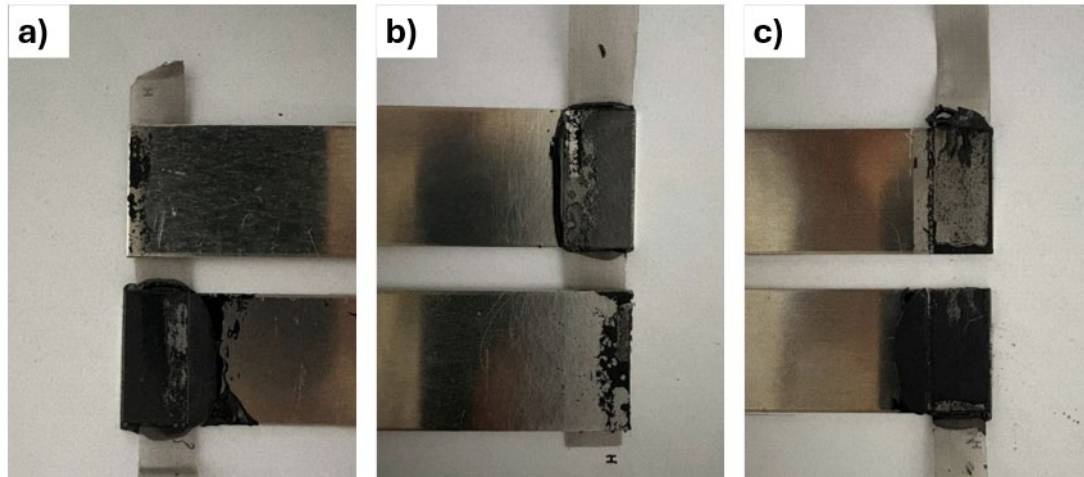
Fracture surfaces analysis of the a) degreased, b) abraded, c) textured bonded joints.
